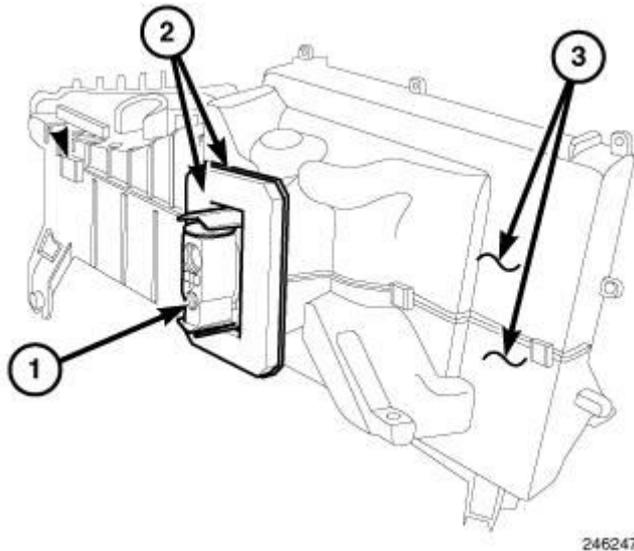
A/C Expansion Valve, Foam Seal, Plastic Flange & HVAC Housing
